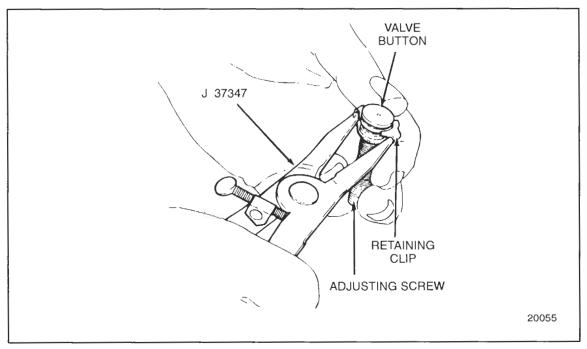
Valve Button Retainer Clip Removal and Installation
